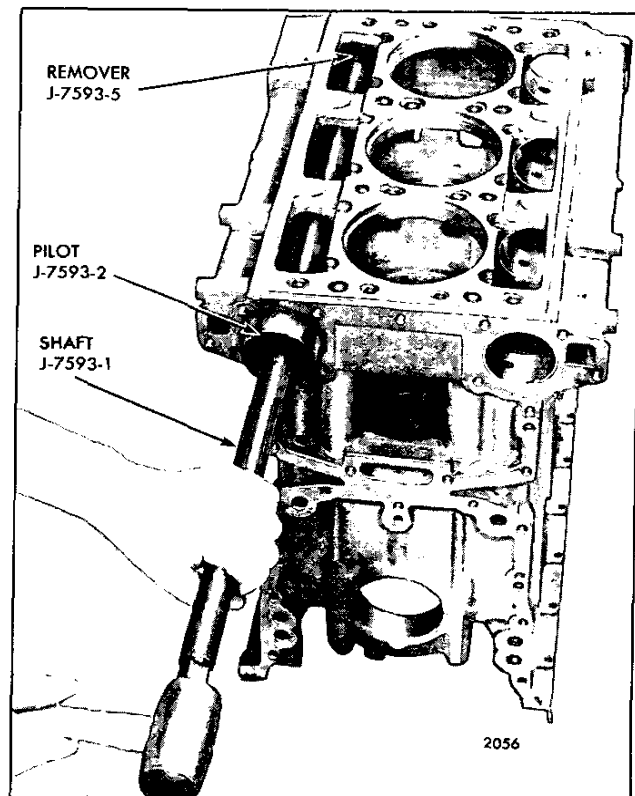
Removing End Bearing with Tools J 7593-1, J 7593-2 and J 7593-5
